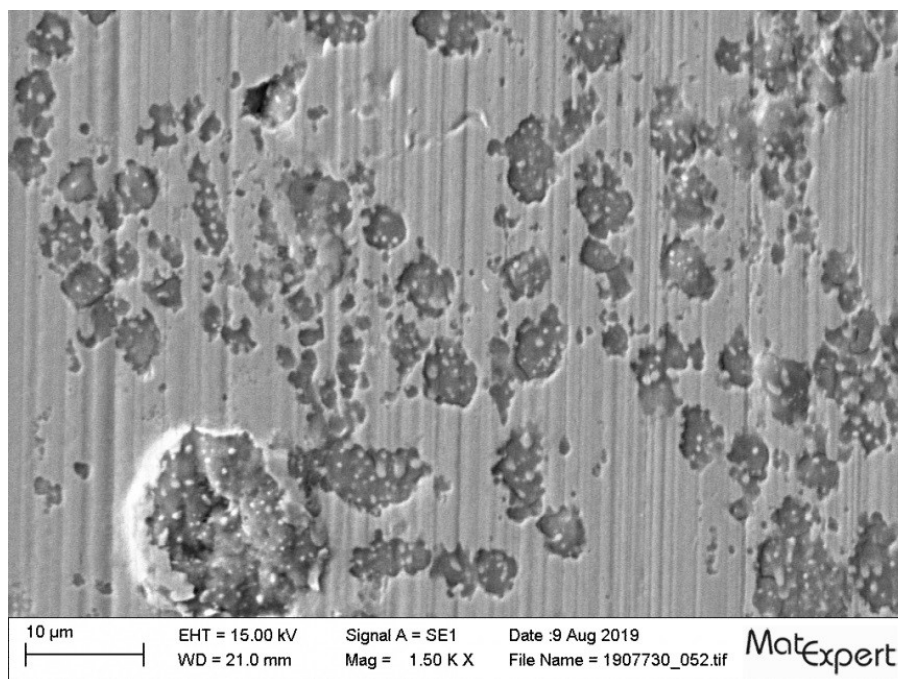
Bearing no. 3, outer-race bearing track – pitting.
